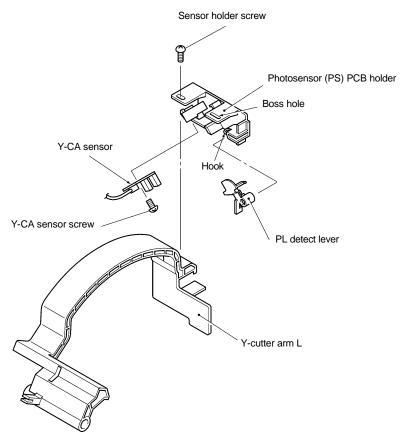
Reassembling the Y-cutter Arm L
